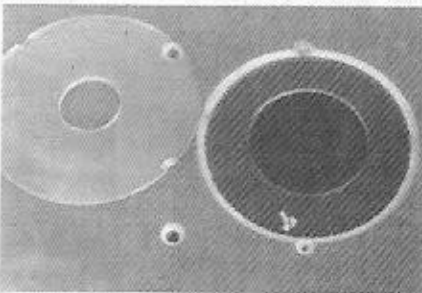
Two throat liners, with countersinks drilled for hold-down screws.
